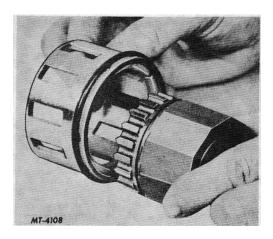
Separating Axle Shaft Hub from Roller Cage
